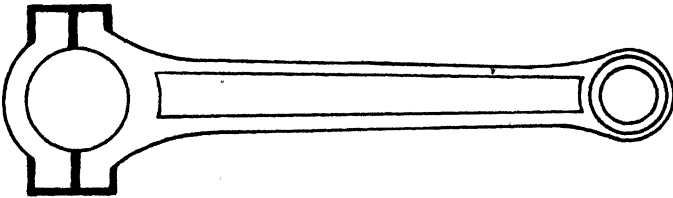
Surface broaching of a connecting rod (thick lines).
